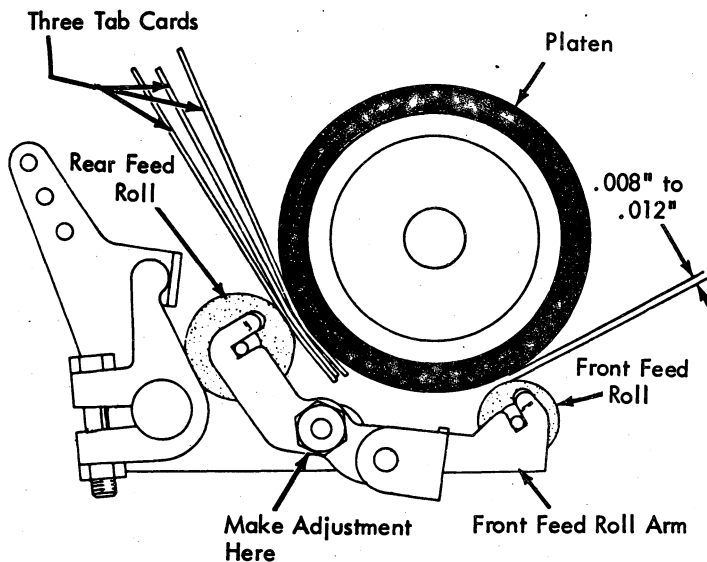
Feed Roll Adjusting Eccentrics (Early)
